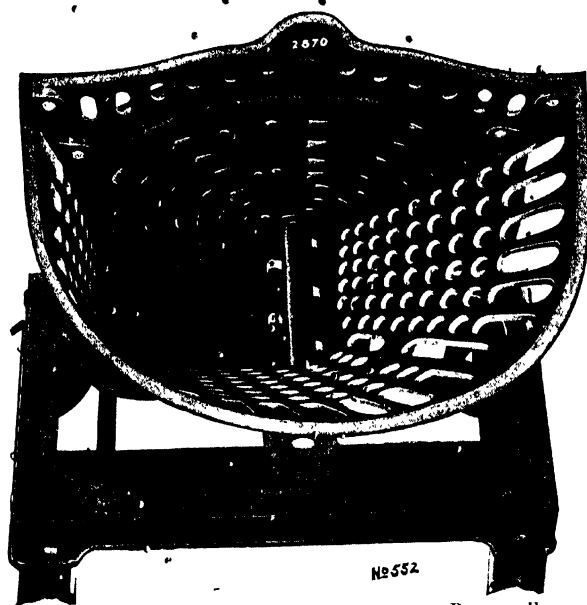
HOPPER OF DISC CUTTER, SHOWING ROTARY FEED.
